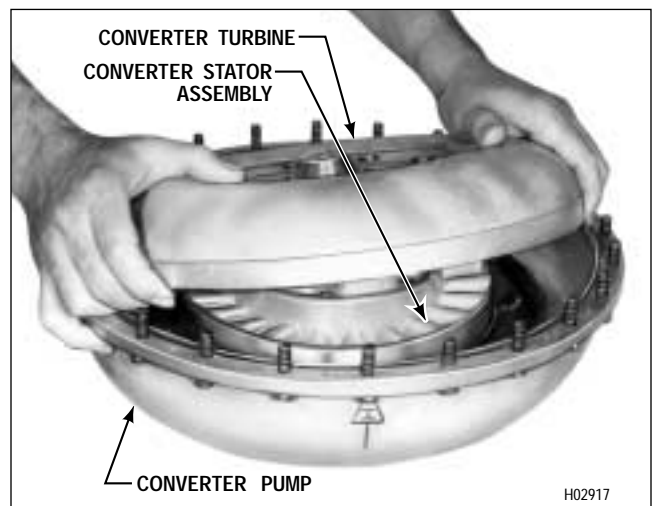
Removing (or Installing) Torque Converter Turbine (AT 543)
